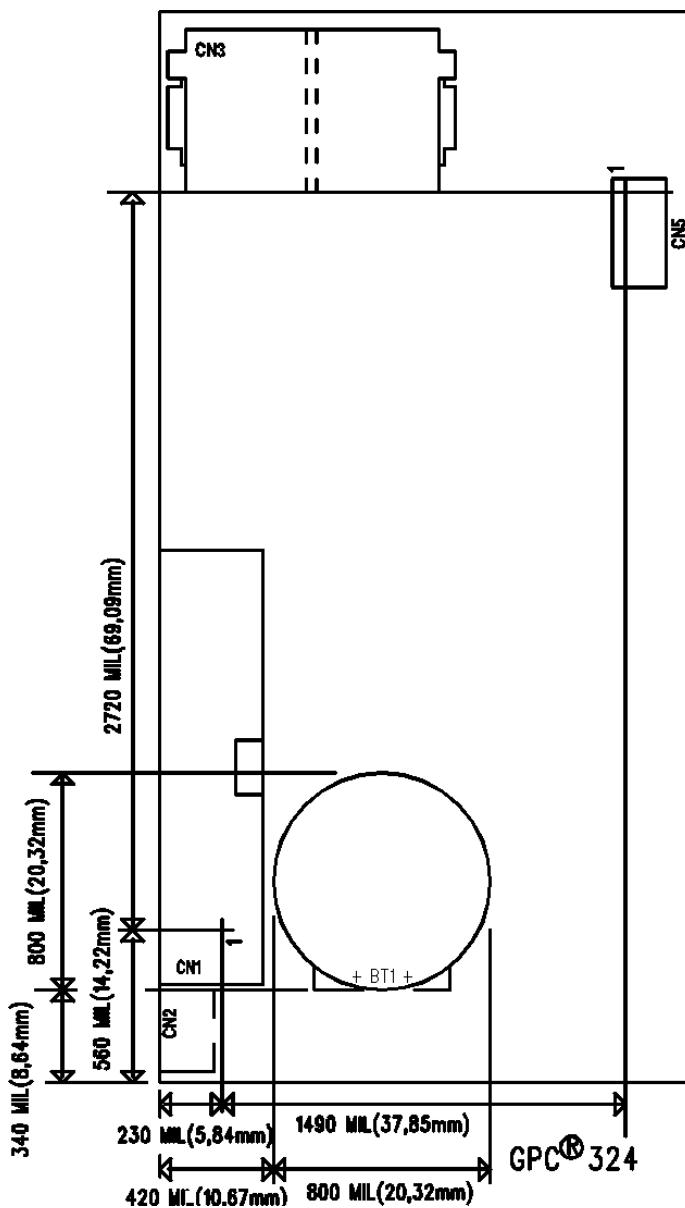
MODULE DIMENSION FOR PIGGY BACK MOUNTING
